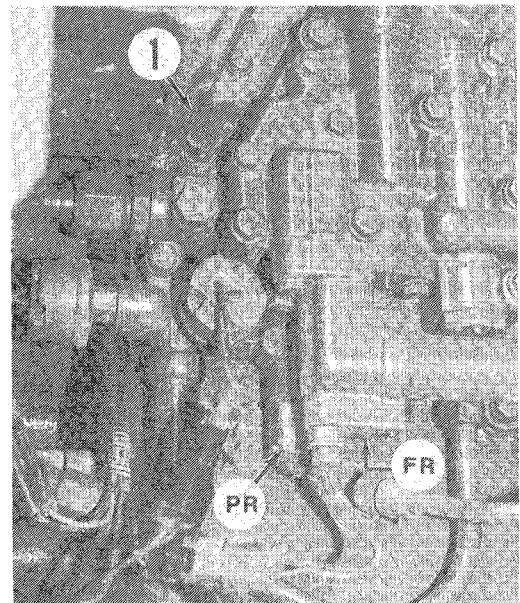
A—On Power Shift models, install a 0-300 psi (0-2000 kPa) pressure gage in test port (1) to check clutch pressure.
